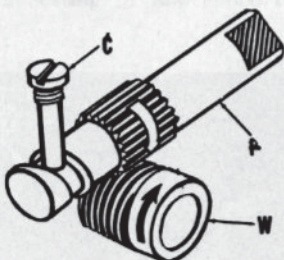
View showing operation of automatic chain oiler pump. Worm (W) mounted on crankshaft or sprocket shaft turns the plunger (P). As the plunger turns, it is moved back and forth by the cam groove cut in plunger riding on the cam screw (C). Flat on piston end of plunger acts as inlet and outlet valve as the plunger turns past inlet and outlet ports.
